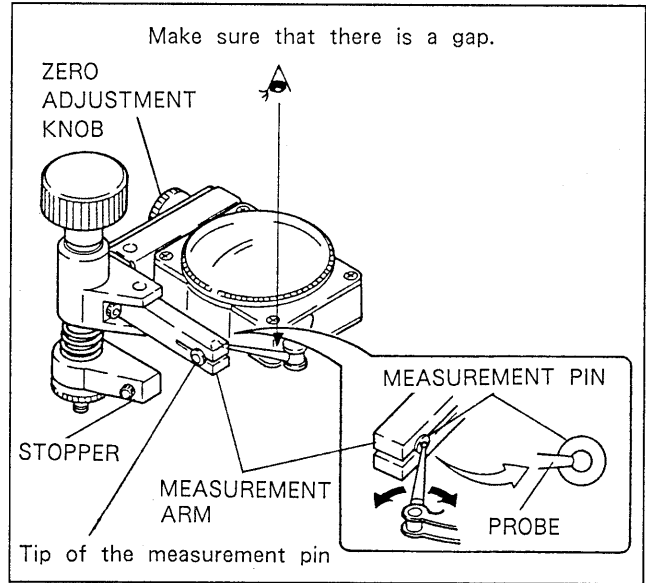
Upper Drum Eccentricity Adjustment Gauge
